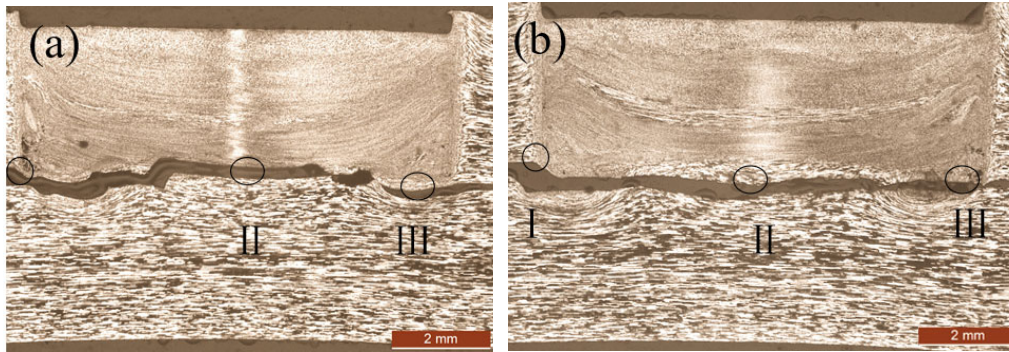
Fracture locations of joints under different plunge depths: (a) 3.4 mm and (b) 4 mm
